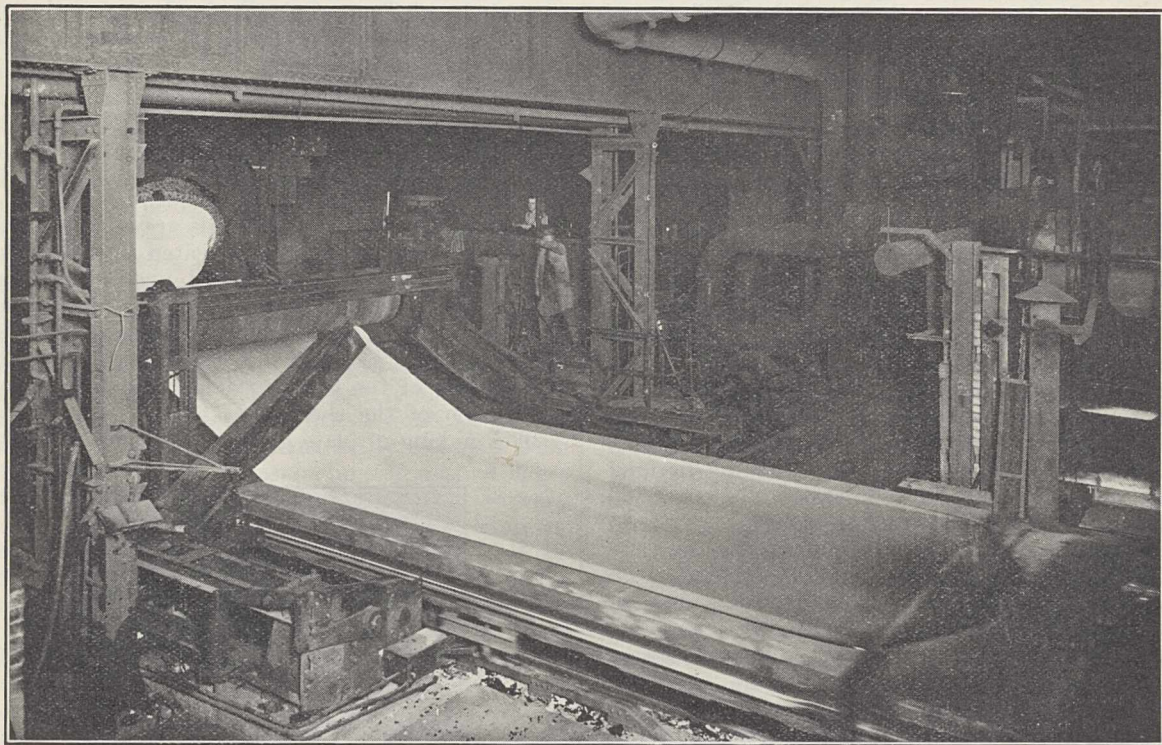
Casting plate glass blanks by the Bicheroux process.
